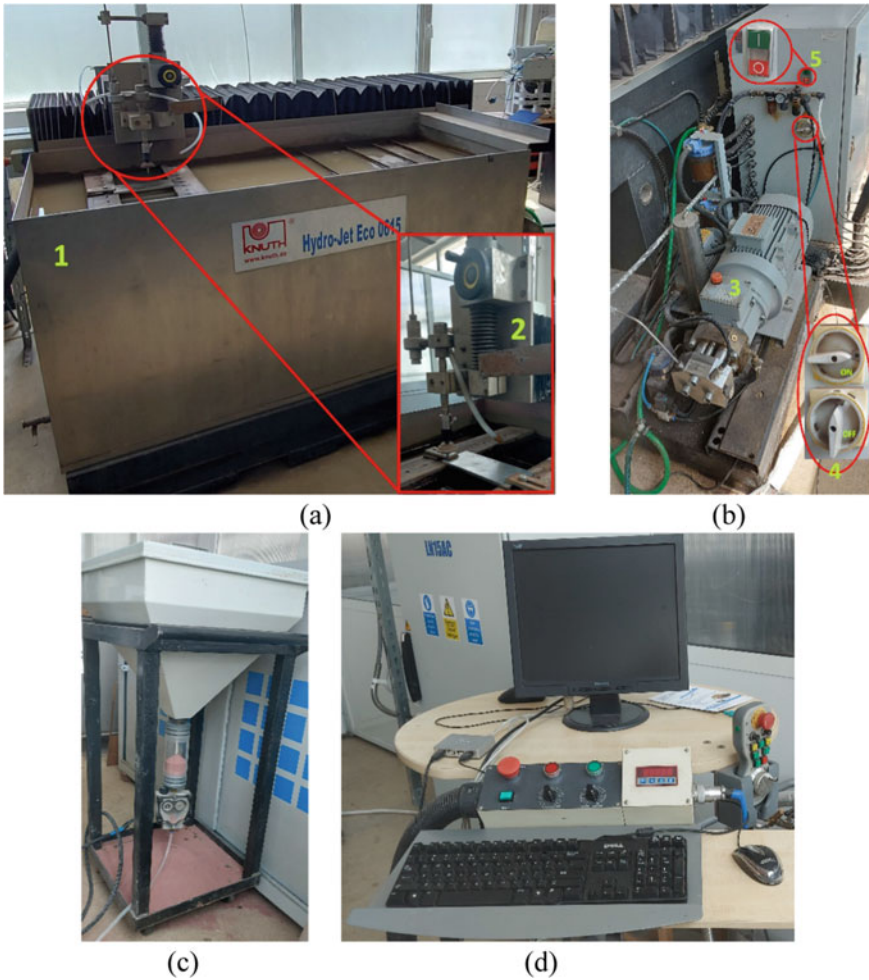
AWJ cutting machine: water tank and the cutting head (a), ultra high-pressure pump and powering buttons (b), abrasive dosing (c), machine control and command (d)
